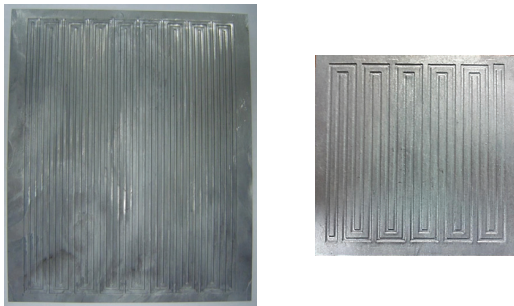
Fabricated bipolar plates by liquid material process: (a) Vacuum die casting and (b) Semi solid forming.
